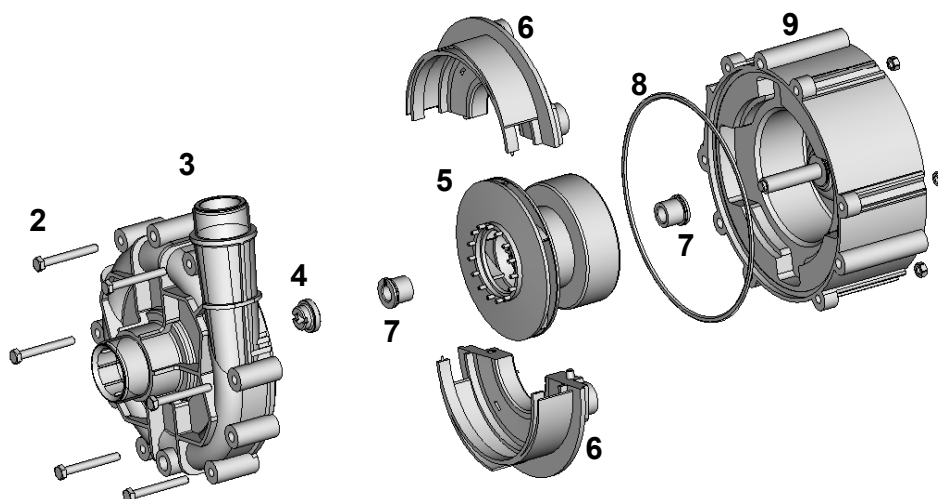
A – disassembling sequence HYDRAULIC PARTS
